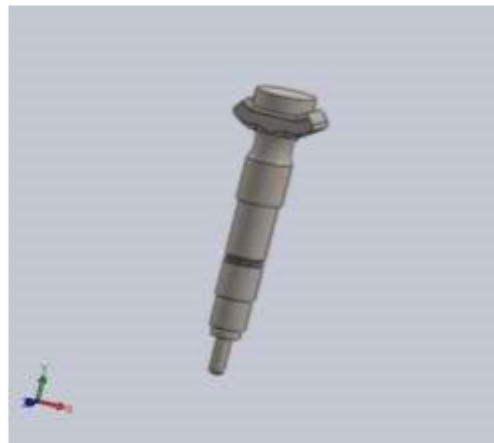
The design of the injector spray nozzle PRE-PROCESSING
